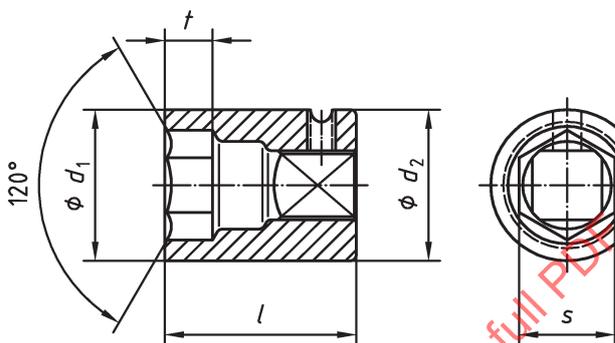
Socket shown with type J square conforming to ISO 1174-2
